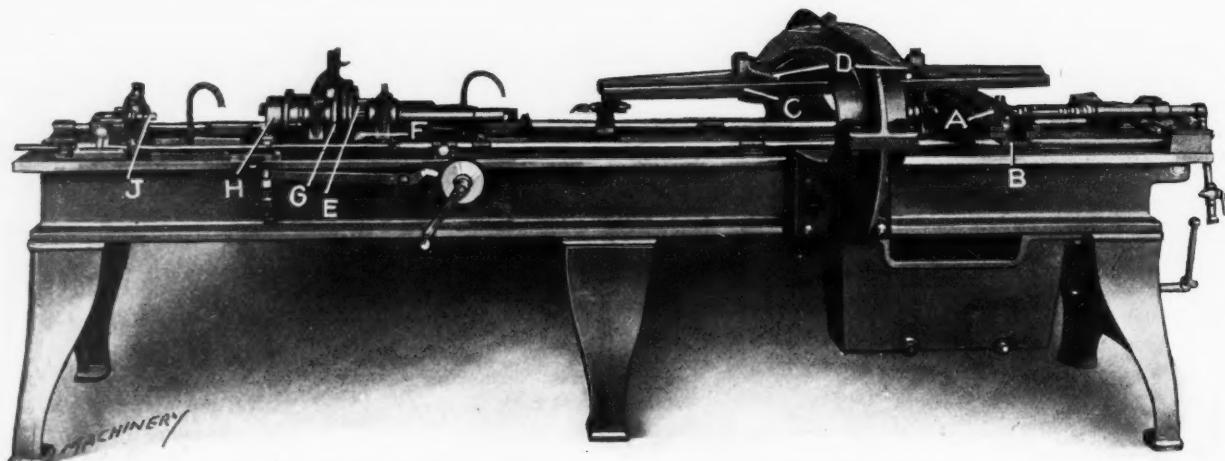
Rifling Machine built by the Diamond Machine Co.
